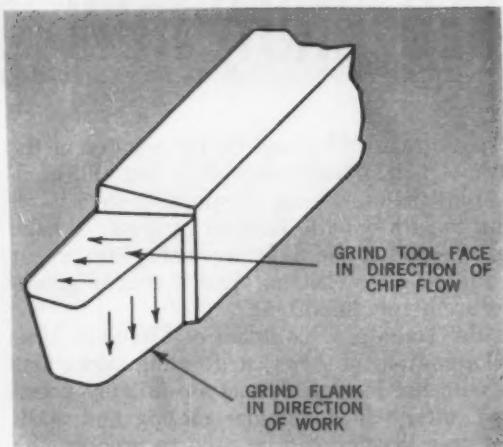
To extend tool life, grinding of the face and flank should be away from the cutting edge, as indicated by the arrows.
